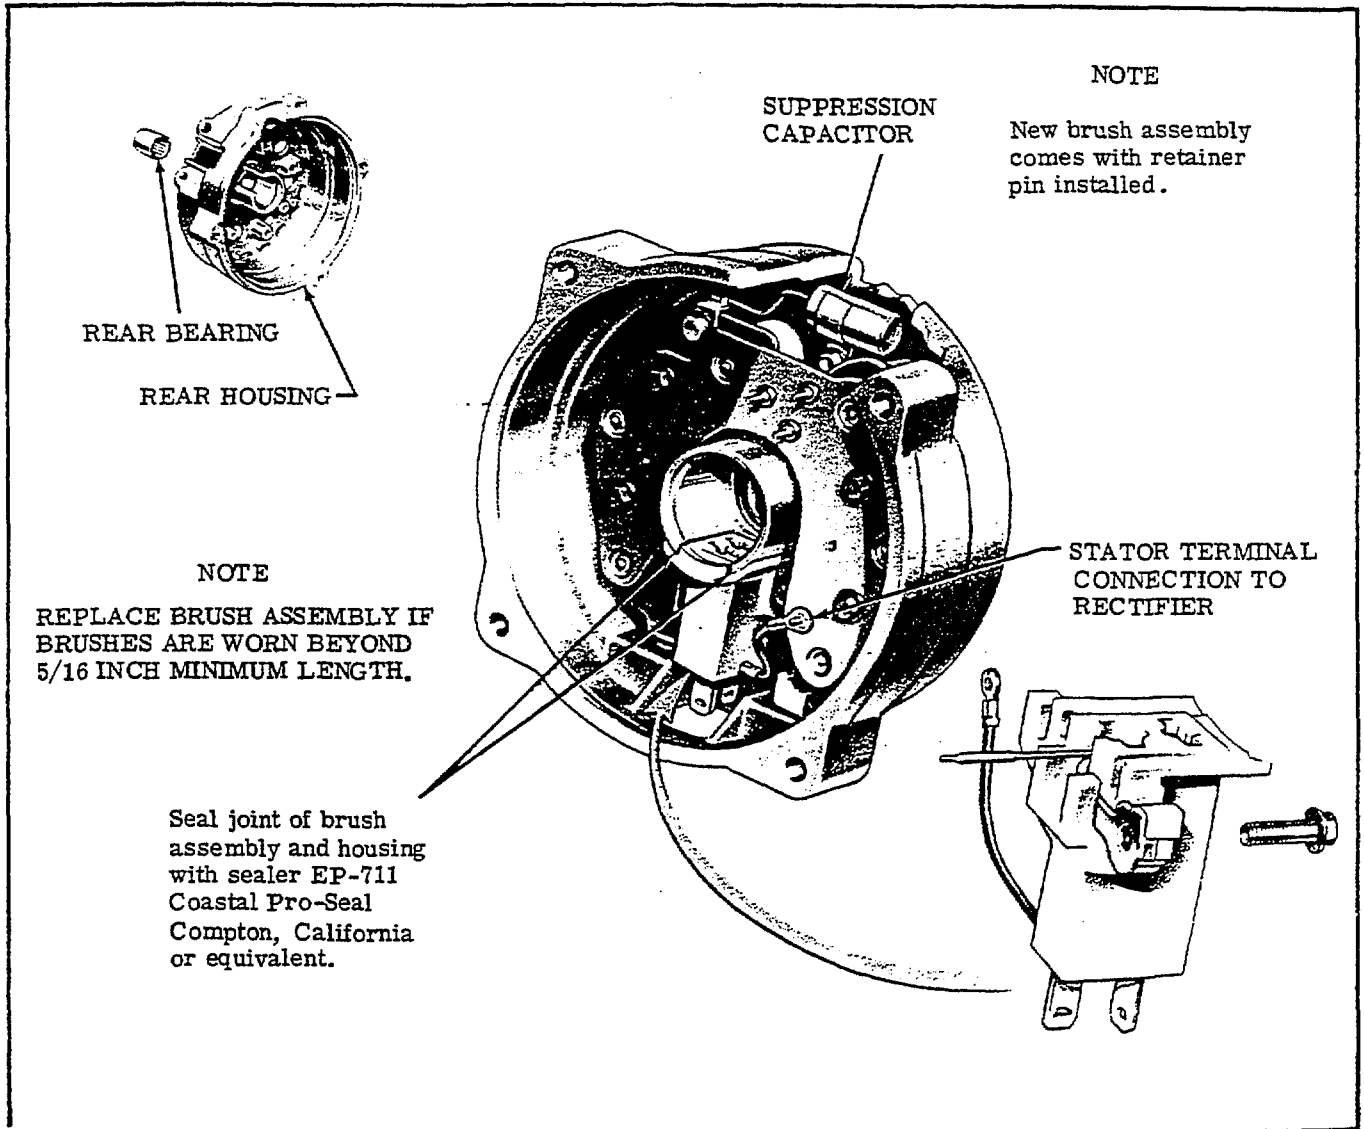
Rear Housing Bearing and Brush Assembly Installation
